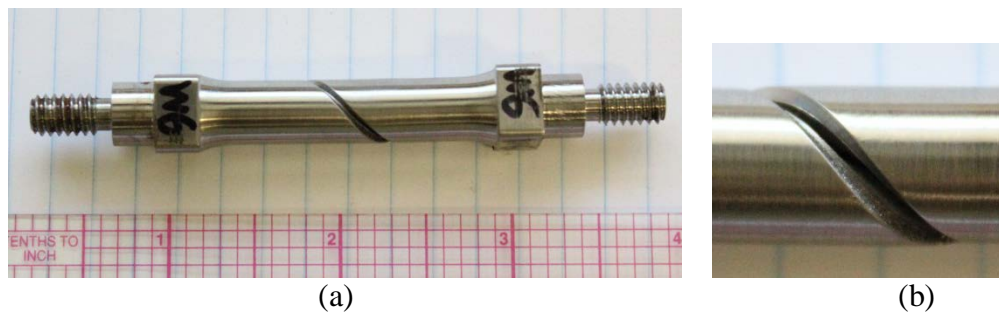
The failed SNTT welded material sample W6: (a) the entire view; (b) the local view of the failed sample.
